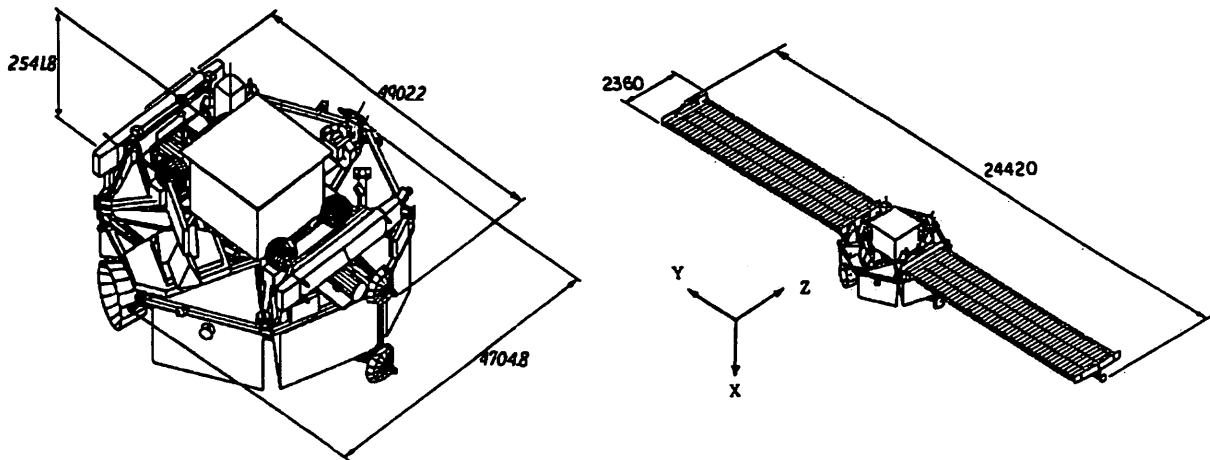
The SFU spacecraft. All dimensions are in millimeters.
